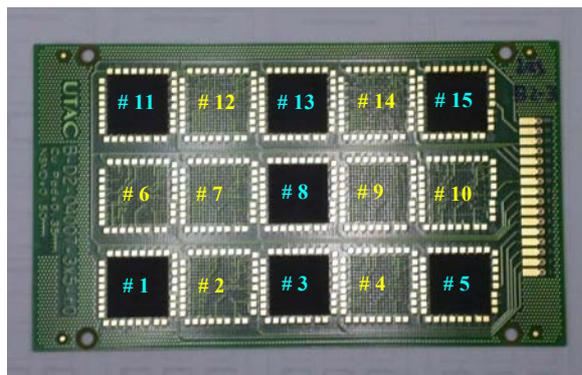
77x132mm PCB with 15x15mm FBGA Packages.
